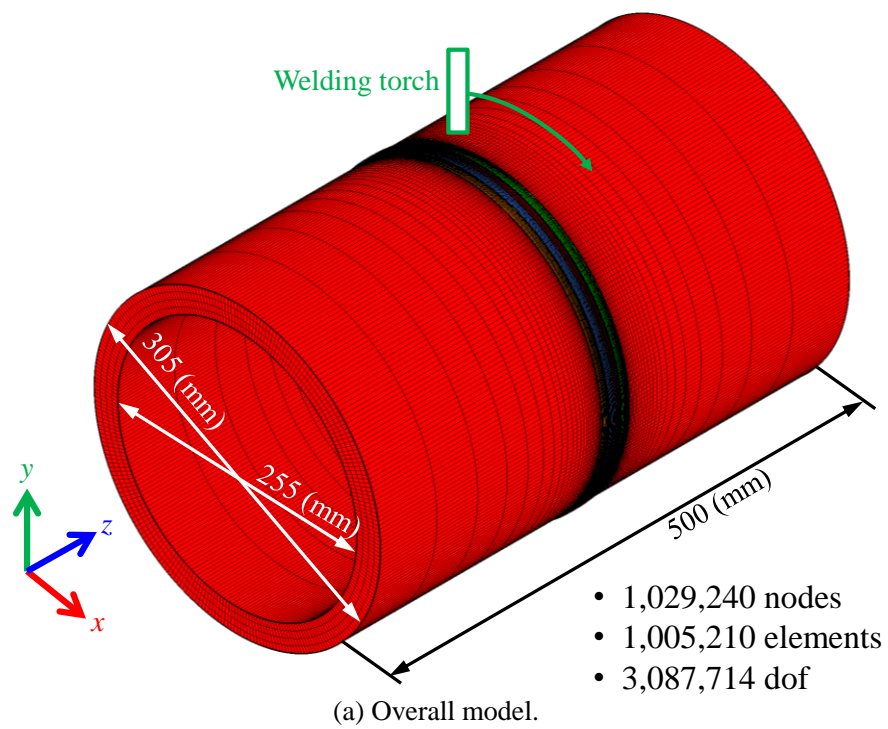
Analysis model of single V groove multi-pass welding.
